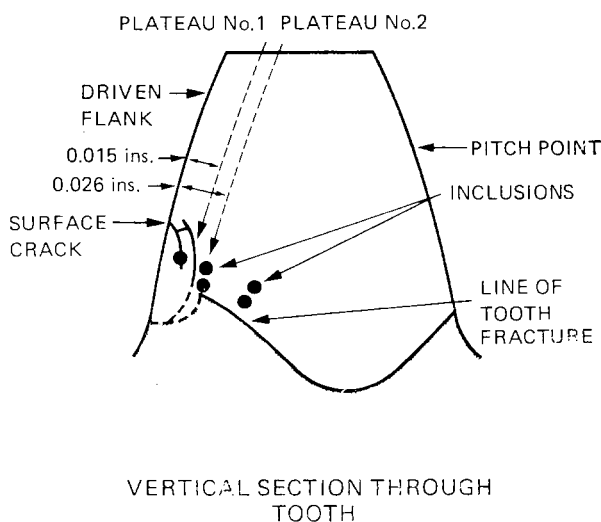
MODEL OF TOOTH FRACTURE OF H.M.S. 'SHEFFIELD' NO. 1 STARBOARD PRIMARY WHEEL TOOTH (NOT TO SCALE)
